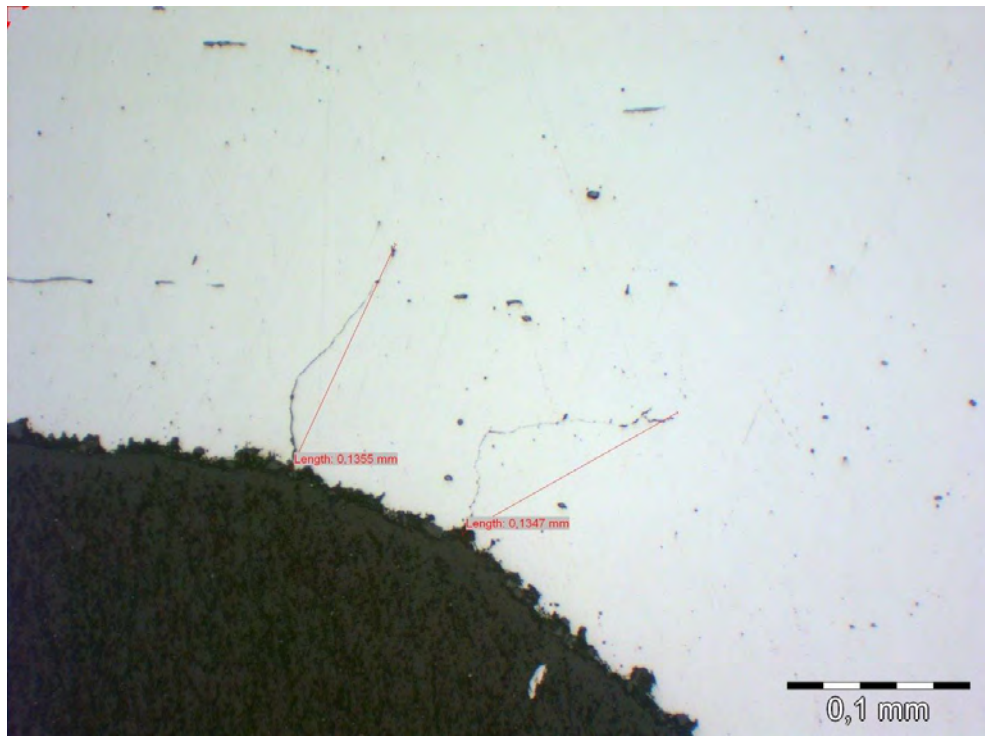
Cut one in crack at segment A, first ridge on barrel no. 14389
